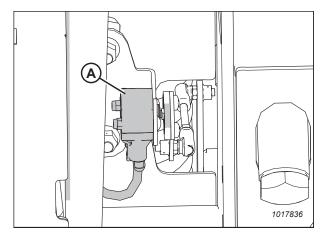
Optional Two-Sensor Kit – Right Sensor
